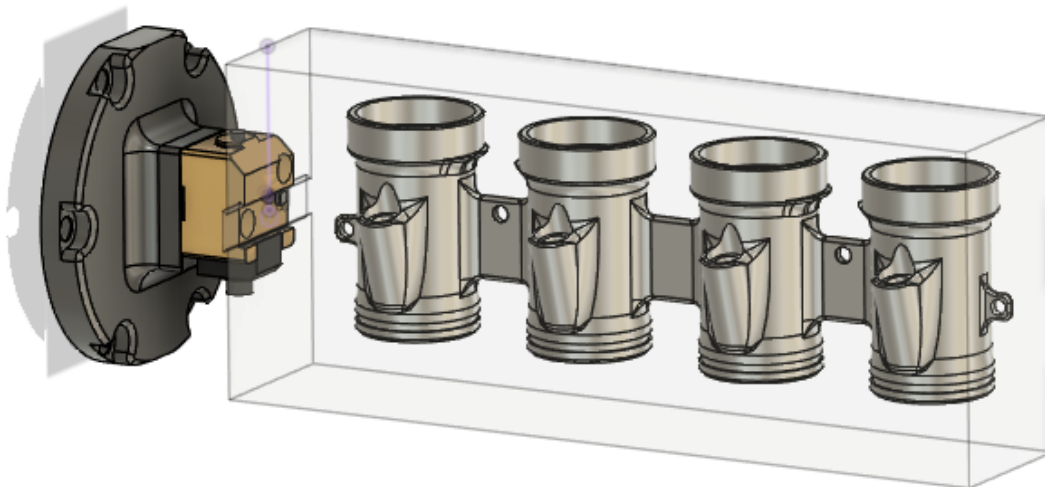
5-Axis Machining Setup, Dovetail Vise and translucent raw material
